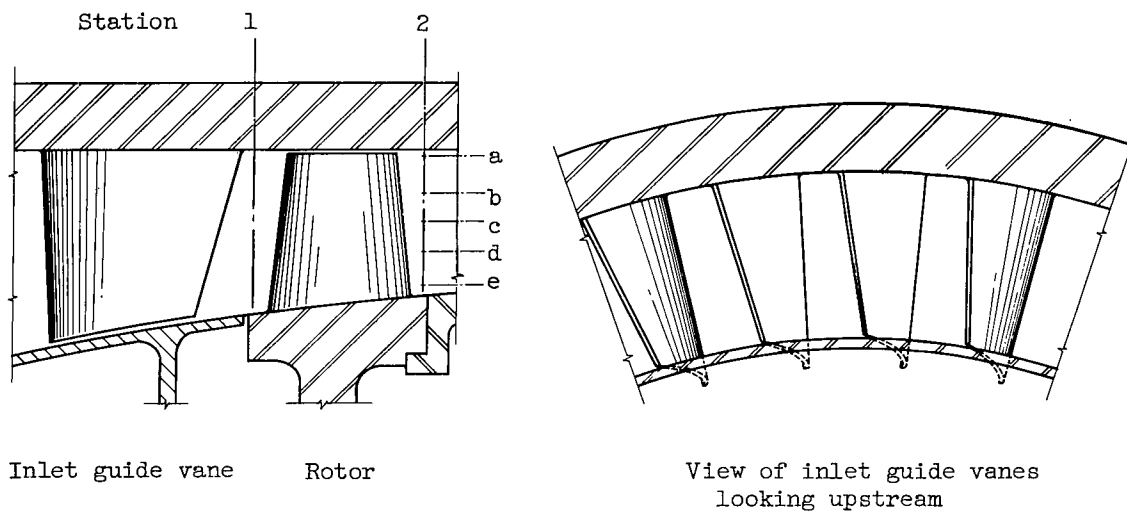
Schematic layout for tests of inlet guide vanes and rotor (ref. 20).
